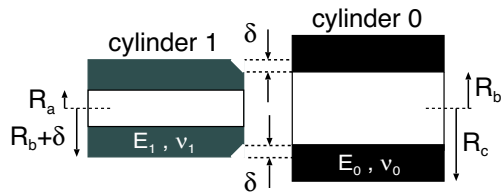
The small cylinder 1 has an outer radius $R_b + \delta$ which is larger than the inner radius R_b of the bigger cylinder 0. The small cylinder can be inserted in the bigger one with an external force, or by cooling the small cylinder and heating the big cylinder so the thermal contraction of the small cylinder and thermal expansions of the big cylinder changes the dimensions so that the cylinders to be joined together without an external force (Color figure online)
